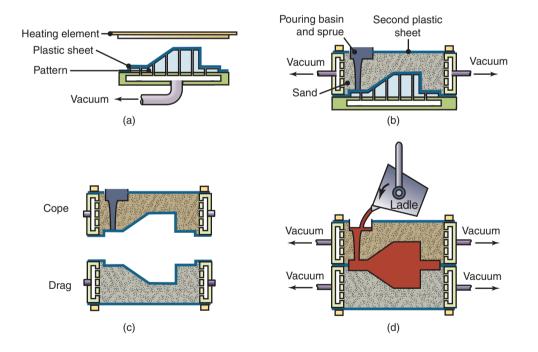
The vacuum molding process. (a) A plastic sheet is first thermoformed (see Section 19.6) over a pattern; (b) a vacuum flask is then placed over the pattern, a pouring basin/sprue insert is located, and the flask is filled with sand. A second sheet is located on the top of the sand mold, and a vacuum is applied to tightly compact the sand against the pattern. (c) A drag is also produced, along with cheeks, cores, etc., as in conventional sand casting. The cope and drag can be carefully transported without vacuum being applied. (d) After the mold halves are joined, a vacuum is applied to ensure mold strength, and molten metal is poured into the mold.
